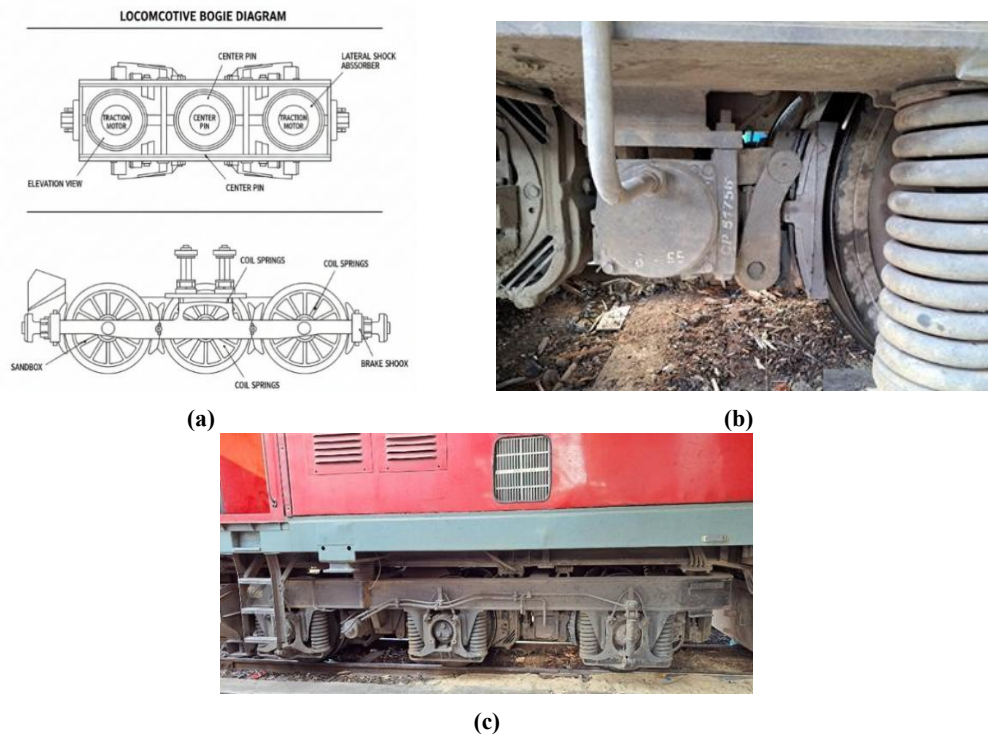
(a) Drawing of the bogie brake rigging of a 14.42-t axle load bogie; (b) Drum Brake Assembly on Bogie Brake Rigging of GE CM22-7i Locomotive; (c) The bogie brake rigging of a 14.42-ton axle load bogie.
